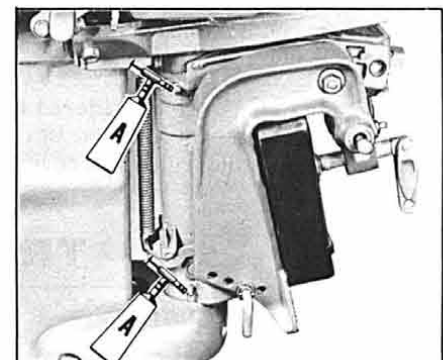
Swivel Bracket Fittings and Reverse Lock
